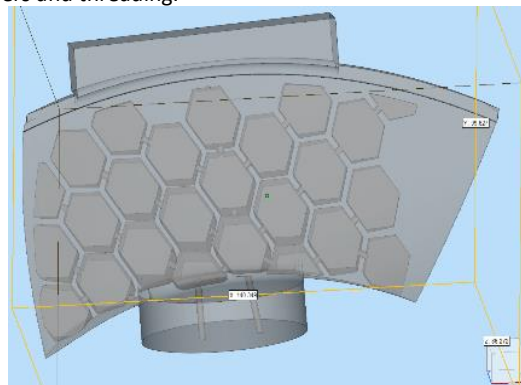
View of the inner honeycomb structure – model, holes for pouring powder are visible in bottom part
